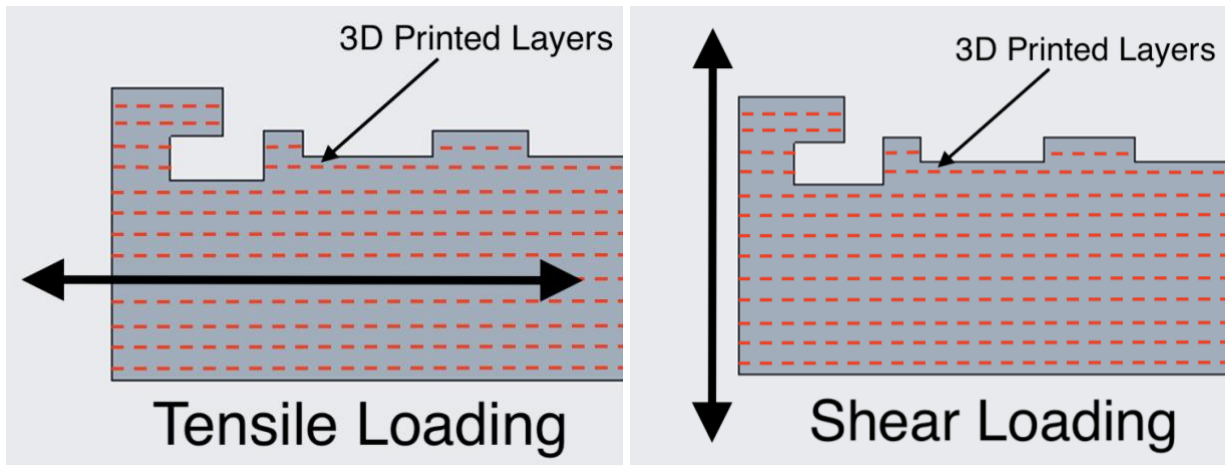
Tensile vs. Shear Loading of the 3D Printed Plate
